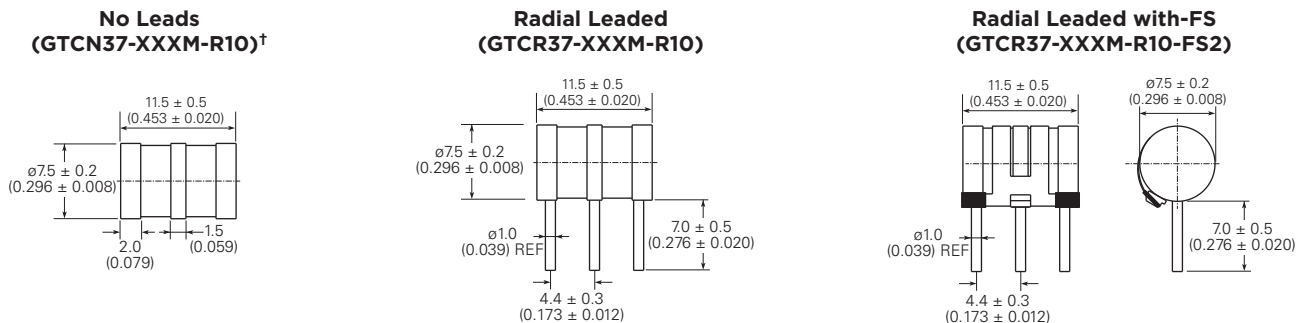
G11 Dimensions for Gas Discharge Tubes
